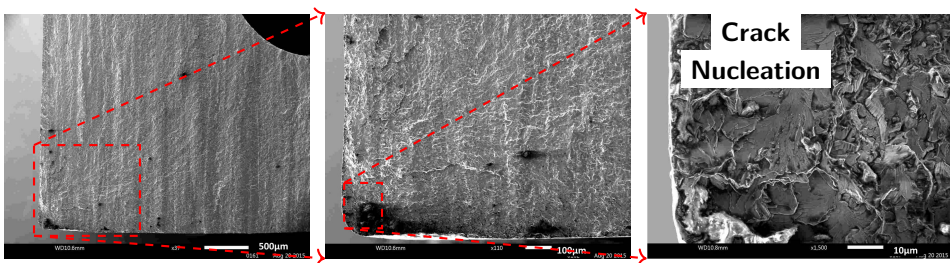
SEM images of the fracture surface of Specimen 7 (wrought material with capillary). The fatigue crack initiated from the bottom left corner of the beam.
